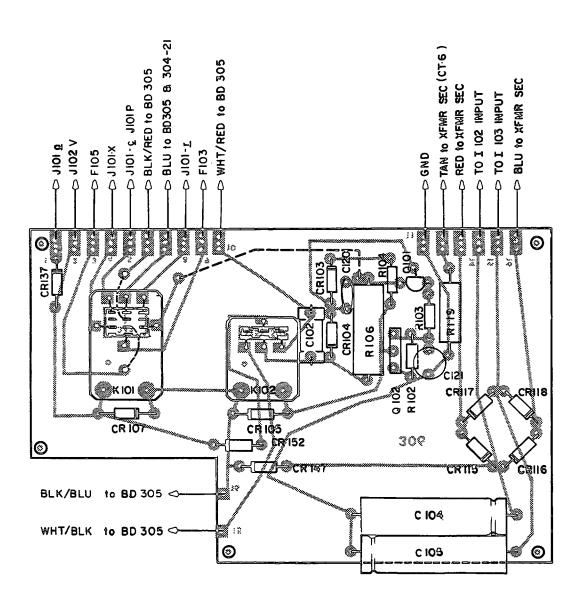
P.C. BOARD ASSEMBLY, BOARD 306, DRAWING (Dwg. 300-05990-0000 Rev. 0)
